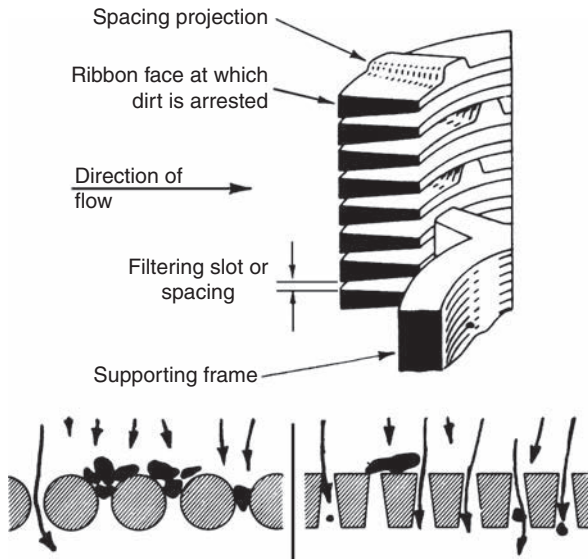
Wedge-wire edge filter. Bottom left: particles can jam in screen; bottom right: particles than can enter, will pass through
